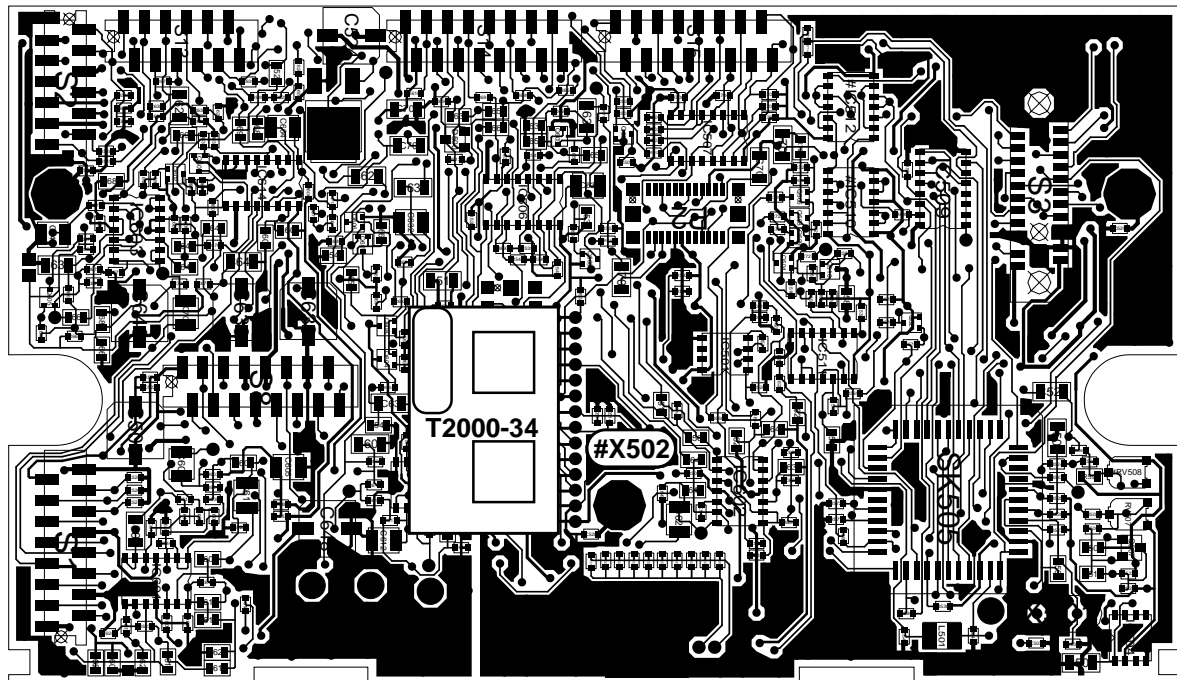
T2000-34 Selcall PCB Mounting - T2010 & T2015 Logic PCB (top side)
